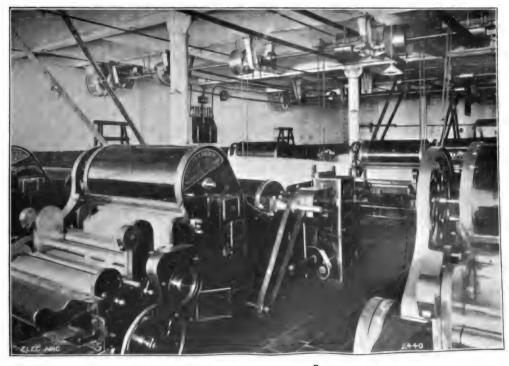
408.H.P. MOTOR DRIVING BLOWING ROOM, ACME MILL.
